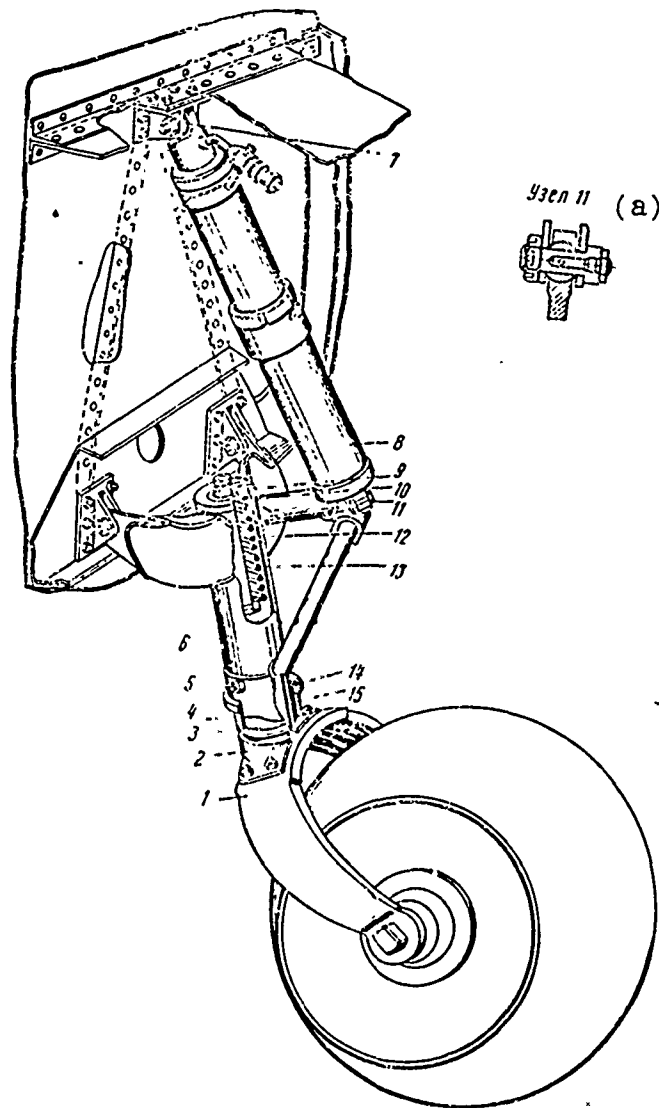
Tail wheel installation: 1 - wheel fork; 2 - heel of pivot (cylinder of fork); 3 - cam of pivot; 4 - housing; 5 - valve grease fitting; 6 - rocking truss; 7 - ball-and-socket joint of shock absorber; 8 - shock absorber; 9 - washer of pivot (cylinder of fork); 10 - upper bronze bushing of pivot; 11 - ball-and-socket hinge of truss; 12 - spring; 13 - pivot (cylinder of fork); 14 - ring; 15 - lower bronze bushing of pivot.
